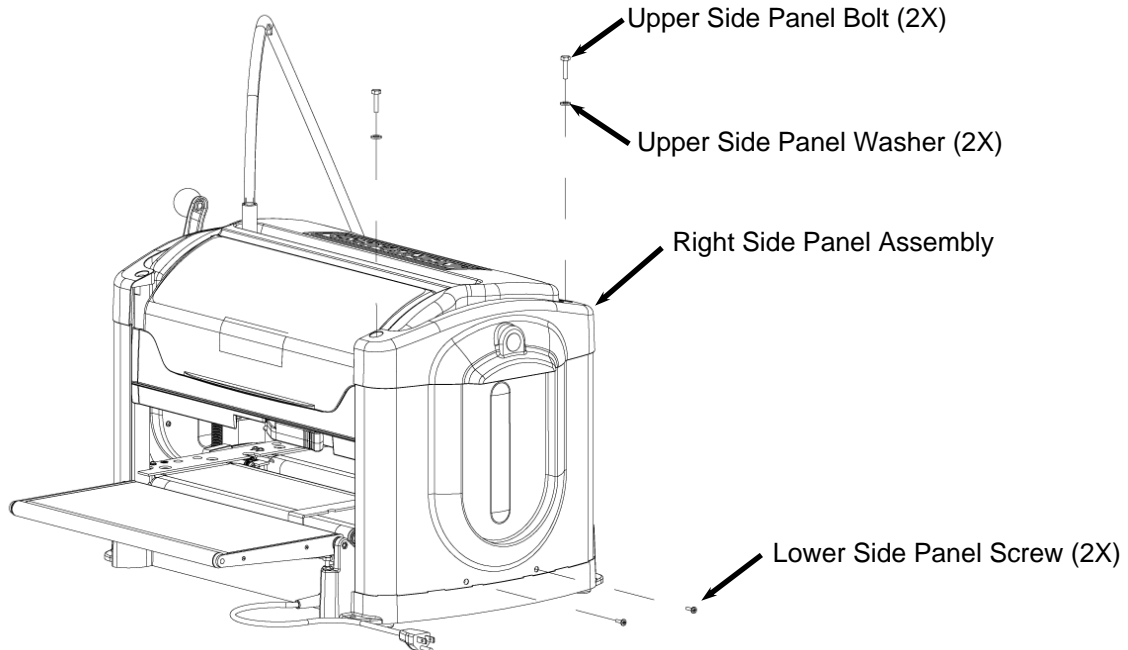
REMOVAL OF THE RIGHT SIDE PANEL
